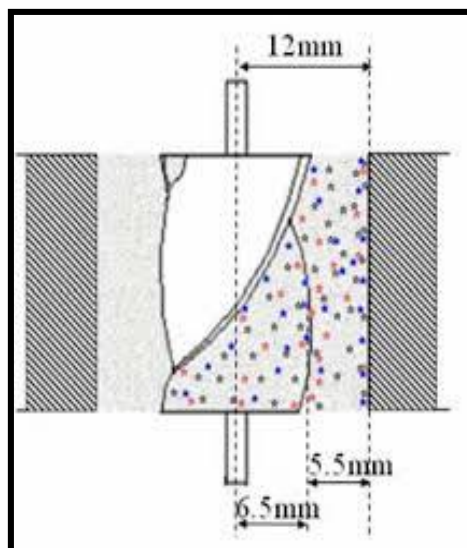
Schematic view of drill bit inside the workpiece finishing area of AFM [35]
